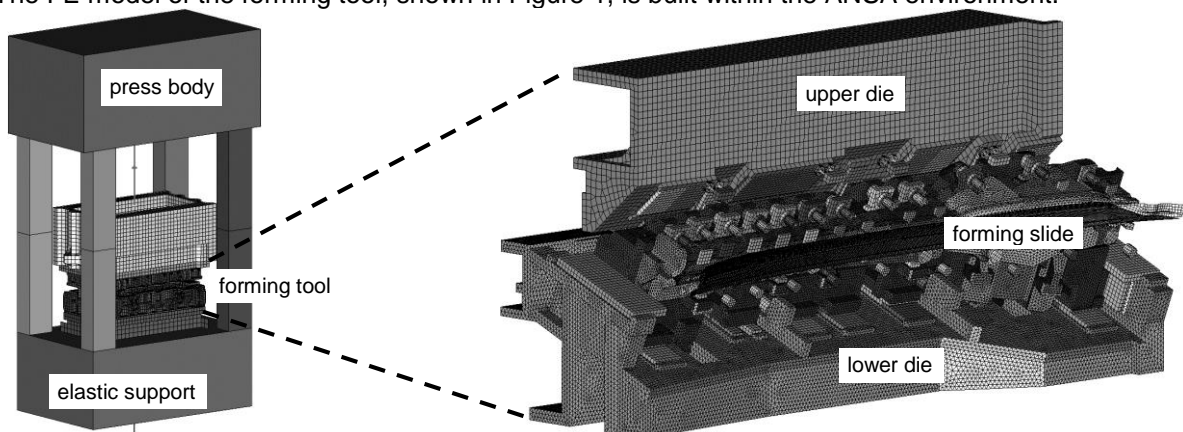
LS-DYNA model of simplified press with the forming slide assembly.
